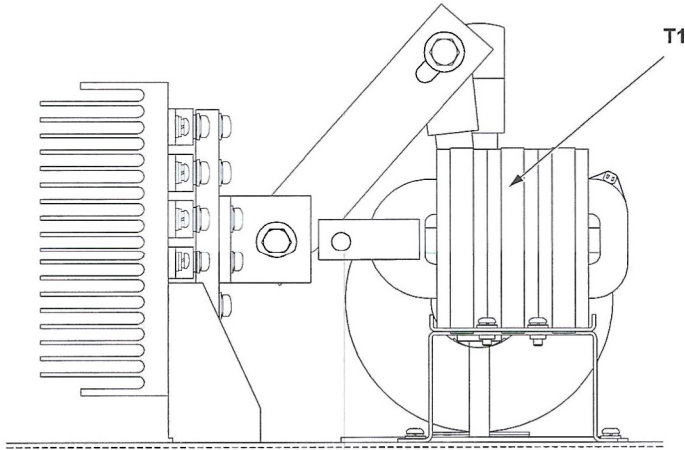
Magnetics Assembly – A3, Sheet 1 of 3
